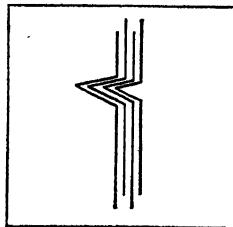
HELE-SHAW CLUTCH PLATES, WITH V-SHAPED GROOVES, THE ONLY PARTS MAKING FRICTIONAL CONTACT
